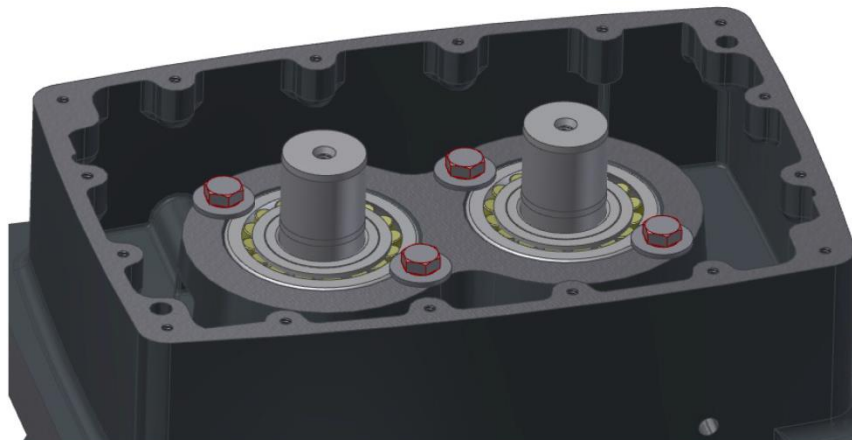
INSTALL BEARING RETAINING SCREWS
